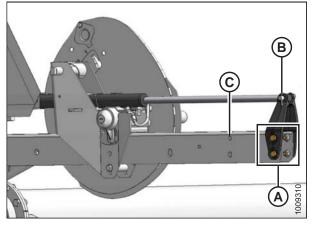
Right Reel Arm Cylinder in Forward Position
